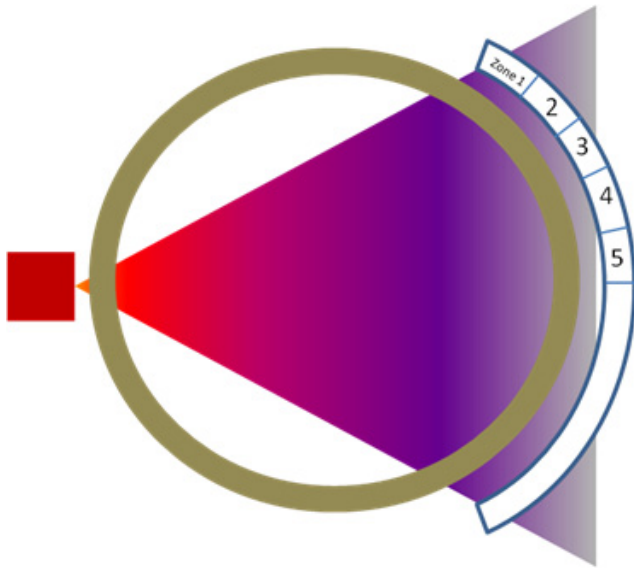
Assessment zones in the circumferential direction for Pipe Sample 1 weld with five zones shown as examples.
